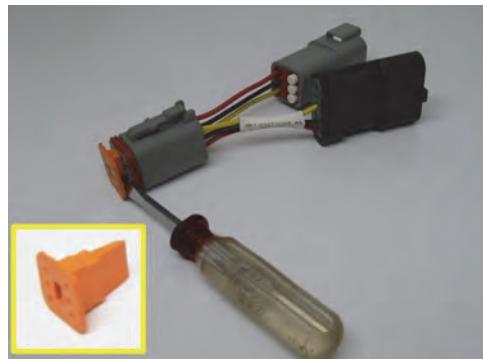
with inset: Removing end cap from 051-0347-000 (EH2)
